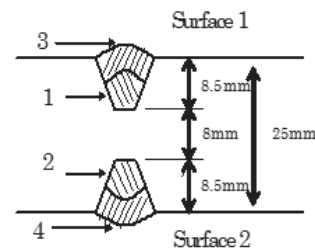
Bead on plate welding procedure of WP specimen. (No. of "1"~"4" denotes the order of welding passes)
